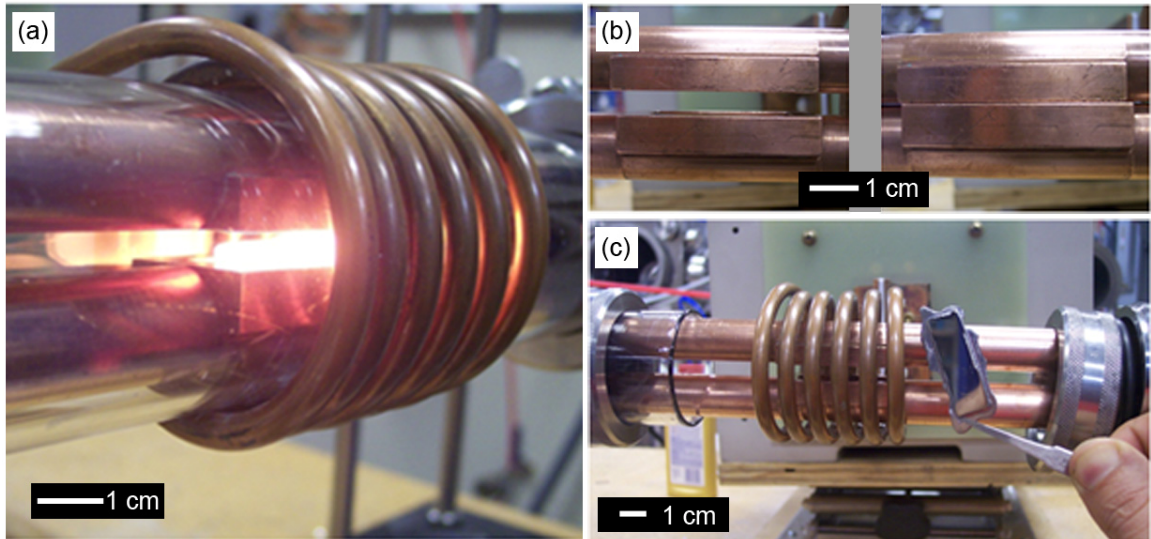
(a) Parallel pipe copper mold assembly heating 10 g sample of Ti-based BMG composite, (b) parallel plates in opened and closed positions, (c) a Ti-based BMG-derived composite cast using the parallel plate copper mold assembly. This set-up is capable of melting 15 g samples.
